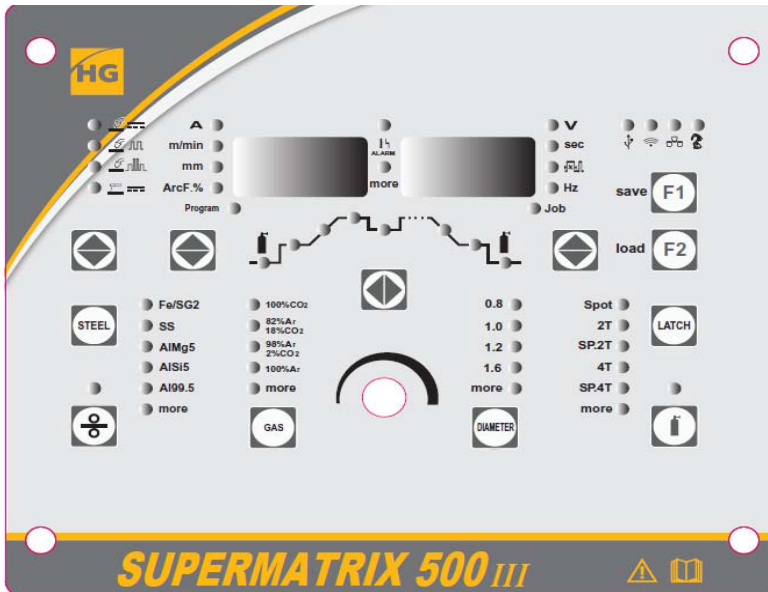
SUPERMATRIX 500III Machine panel sketch
